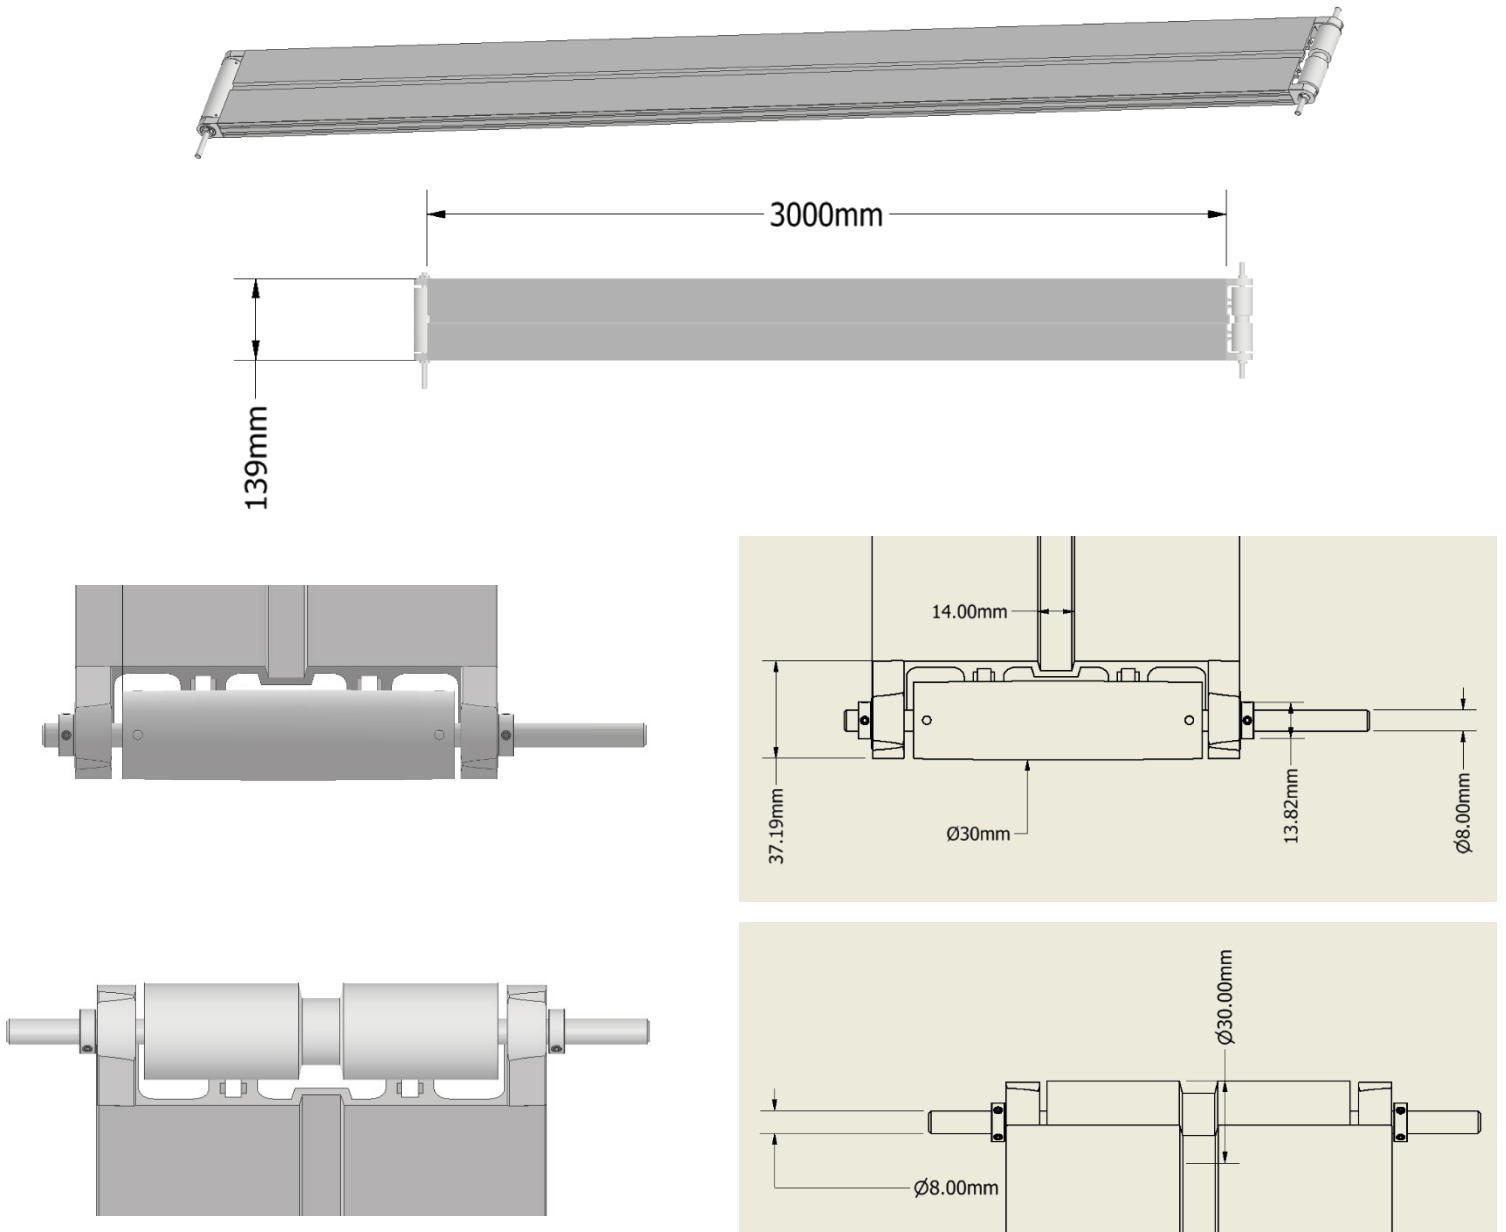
From top to bottom: Isometric view of the conveyor belt system. 3D view and drawing of Drive Pulley system. 3D view and drawing of the Idler system.
